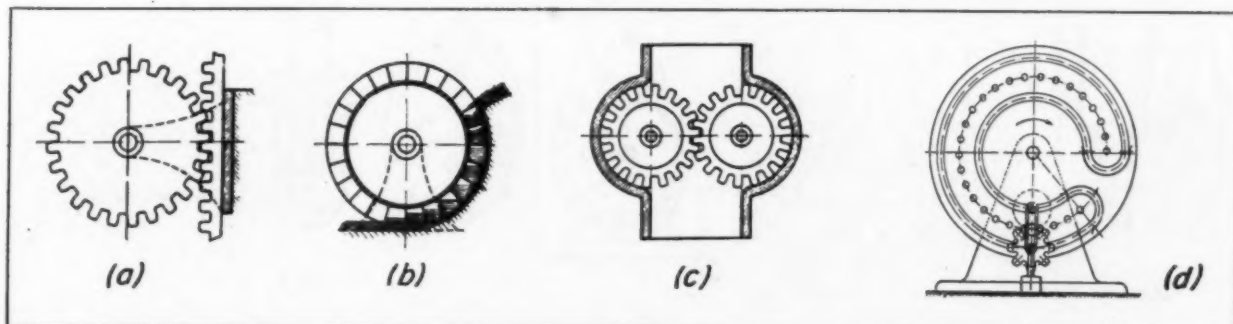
Gear mechanisms: *a*, pinion and rack; *b*, "fluid gear"; *c*, gear pump; *d*, mangle gear. This class contains all the ordinary and epicyclic gear arrangements. Reuleaux included the undershot waterwheel as an example of a fluid gear mechanism
